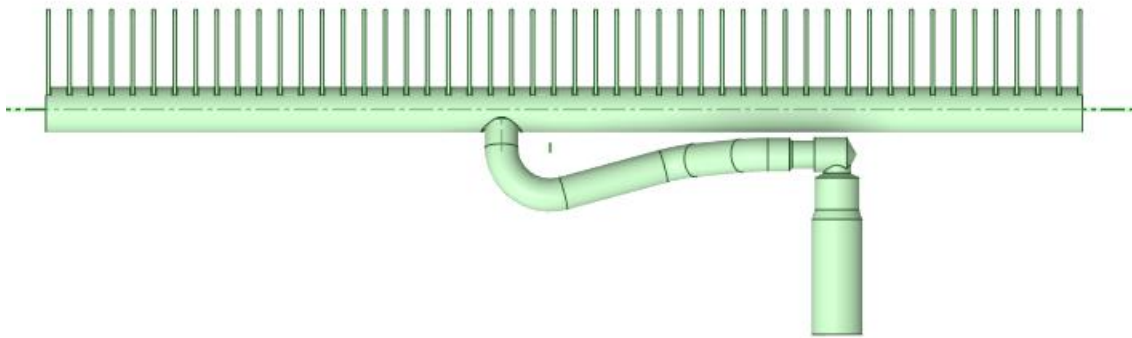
Extracted fluid region of the manifold, jumper tube, inlet, and parts of the flat tubes of the original condenser design.
